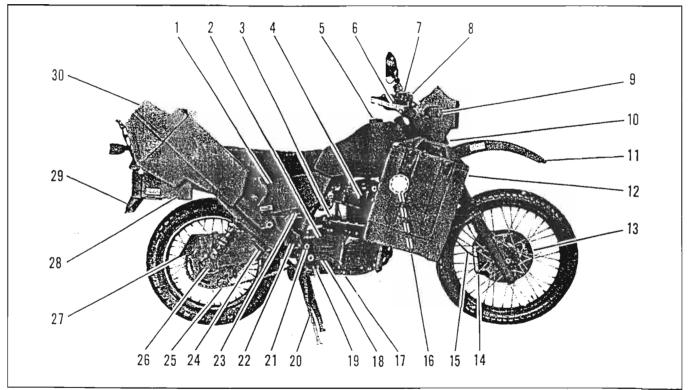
MT350E Motorcycle - Right Side View Showing Component Locations
